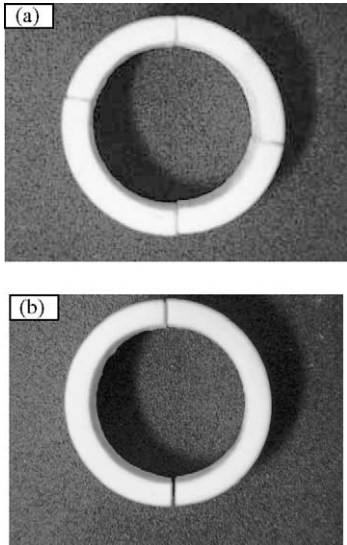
Failure appearance of Type I, (a) after complete failure, (b) after the first maximum peak.
